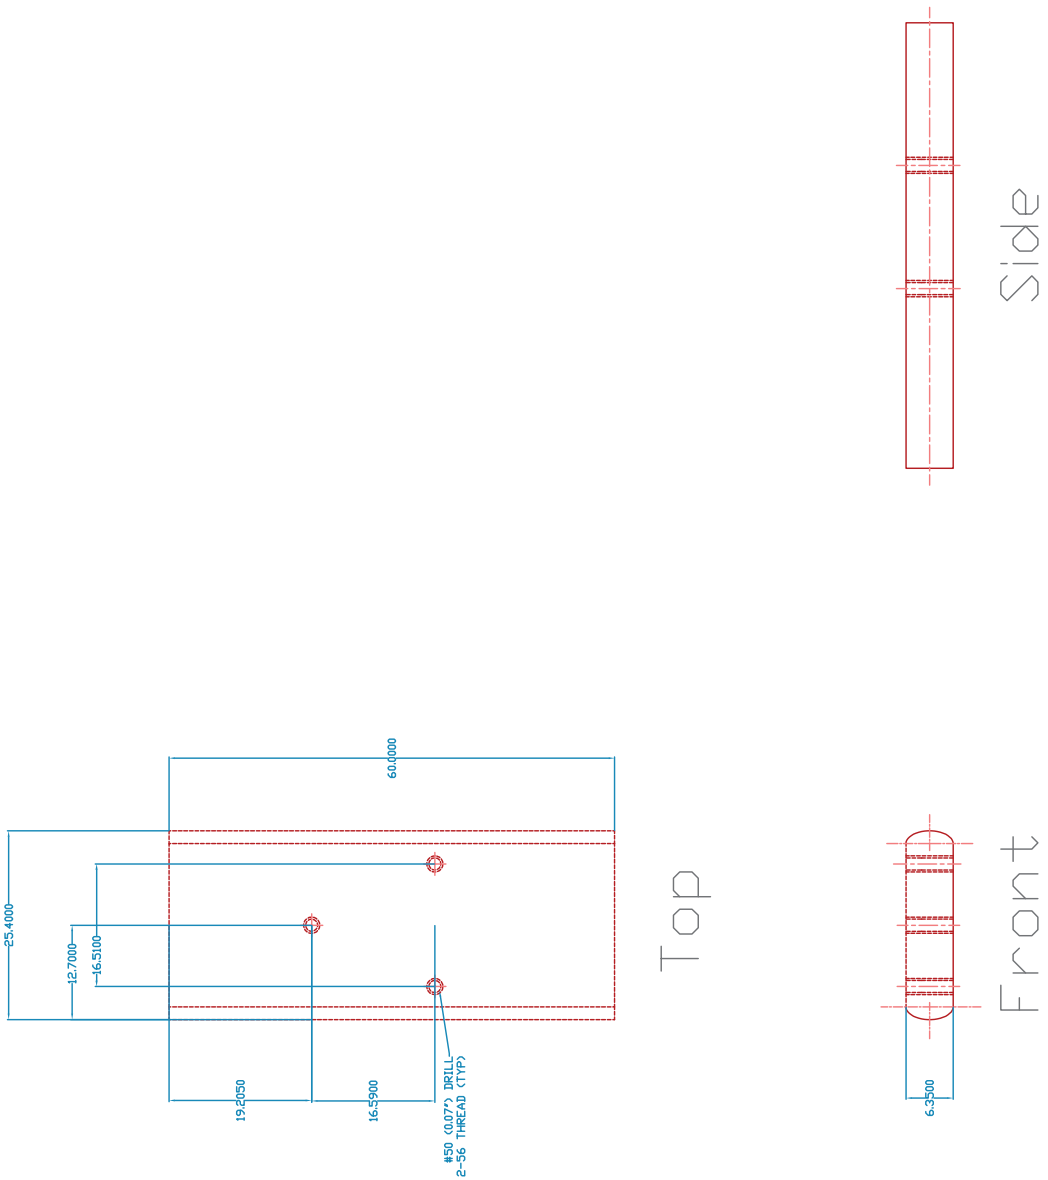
Mechanical drawing of the copper temperature stage (lower block).
